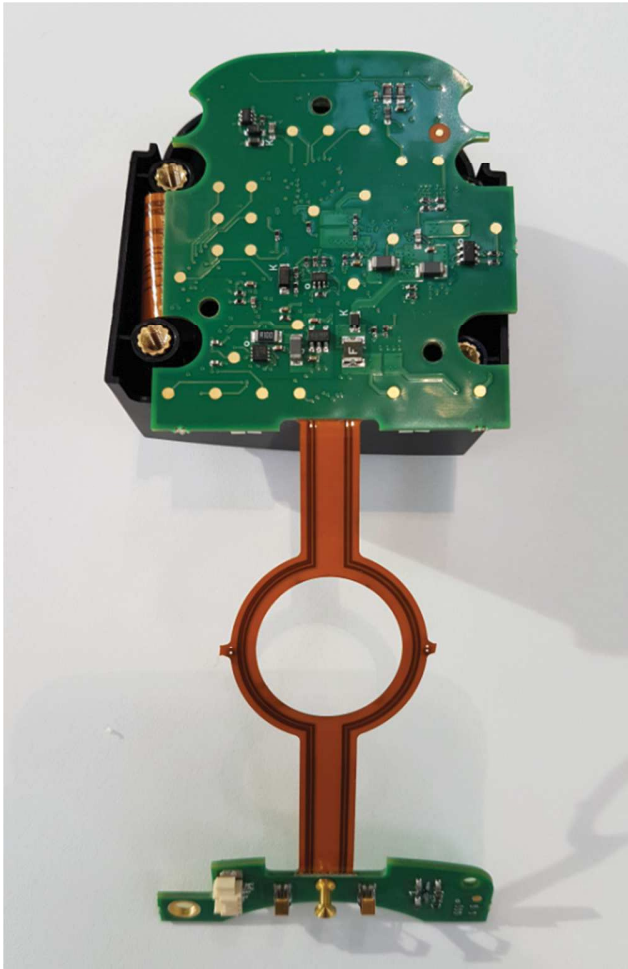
Front view of Radio Module removed from main housing with cover removed
